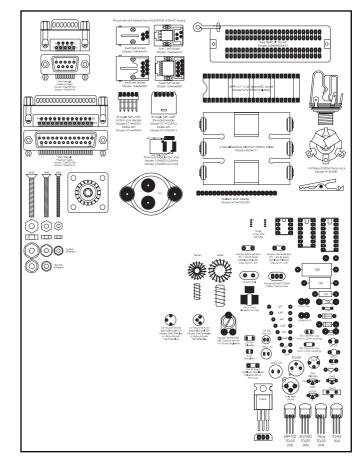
The symbols in the *CorelDraw* PC-board padconfiguration library (Electr Pcb pads.cdr) of N0SS.
